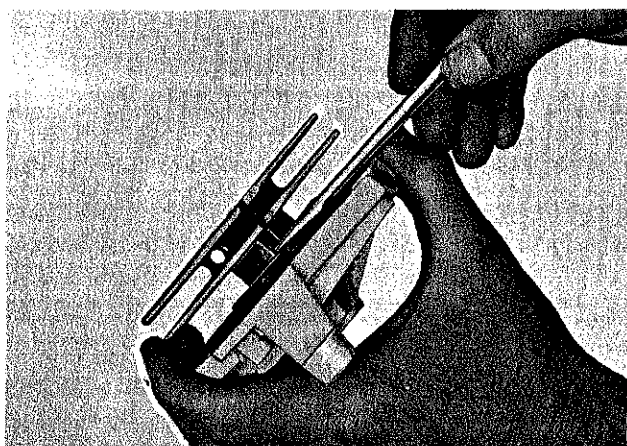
Be careful that the starter spring is not pulled out of the base when removing the starter drum. Hold the spring with a screwdriver to keep it from jumping out. Remove the drum slowly and carefully.
